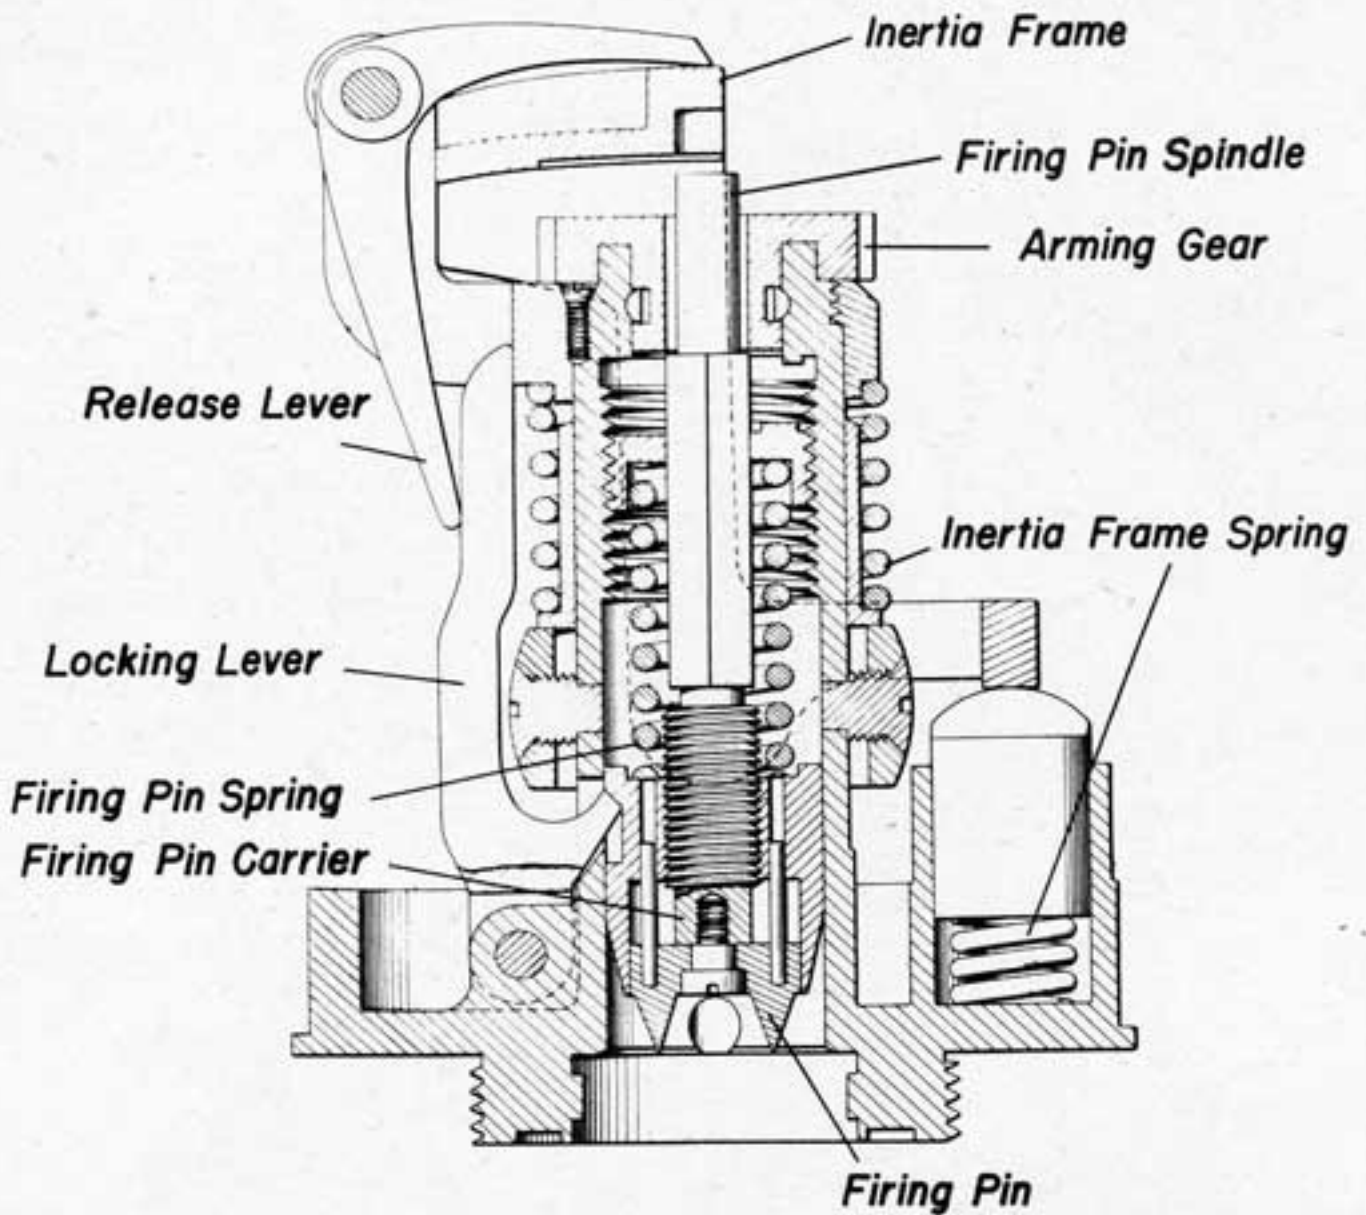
Italian Standard Exploder, Armed Position, Sectional View
